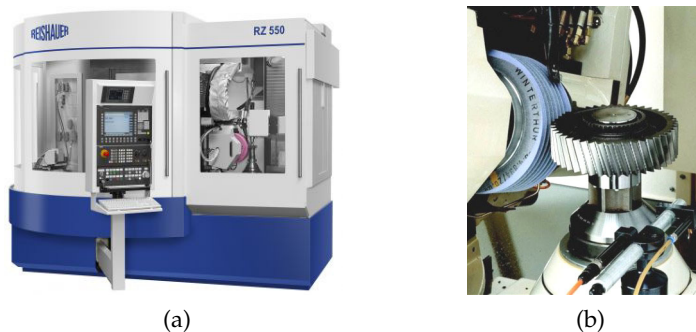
(a) Reishauwer gear grinder. (b) Gear fitting of Reishauwer gear grinder.
